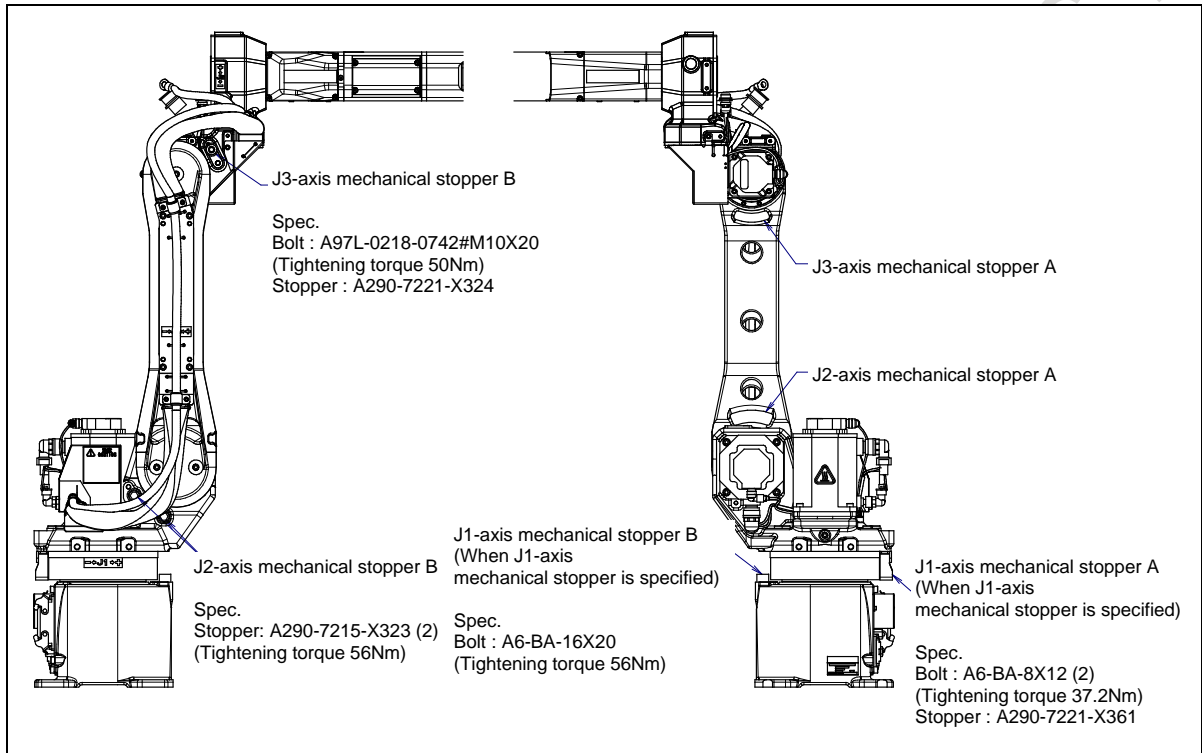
(a) Check of mechanical stopper and adjustable mechanical stopper
